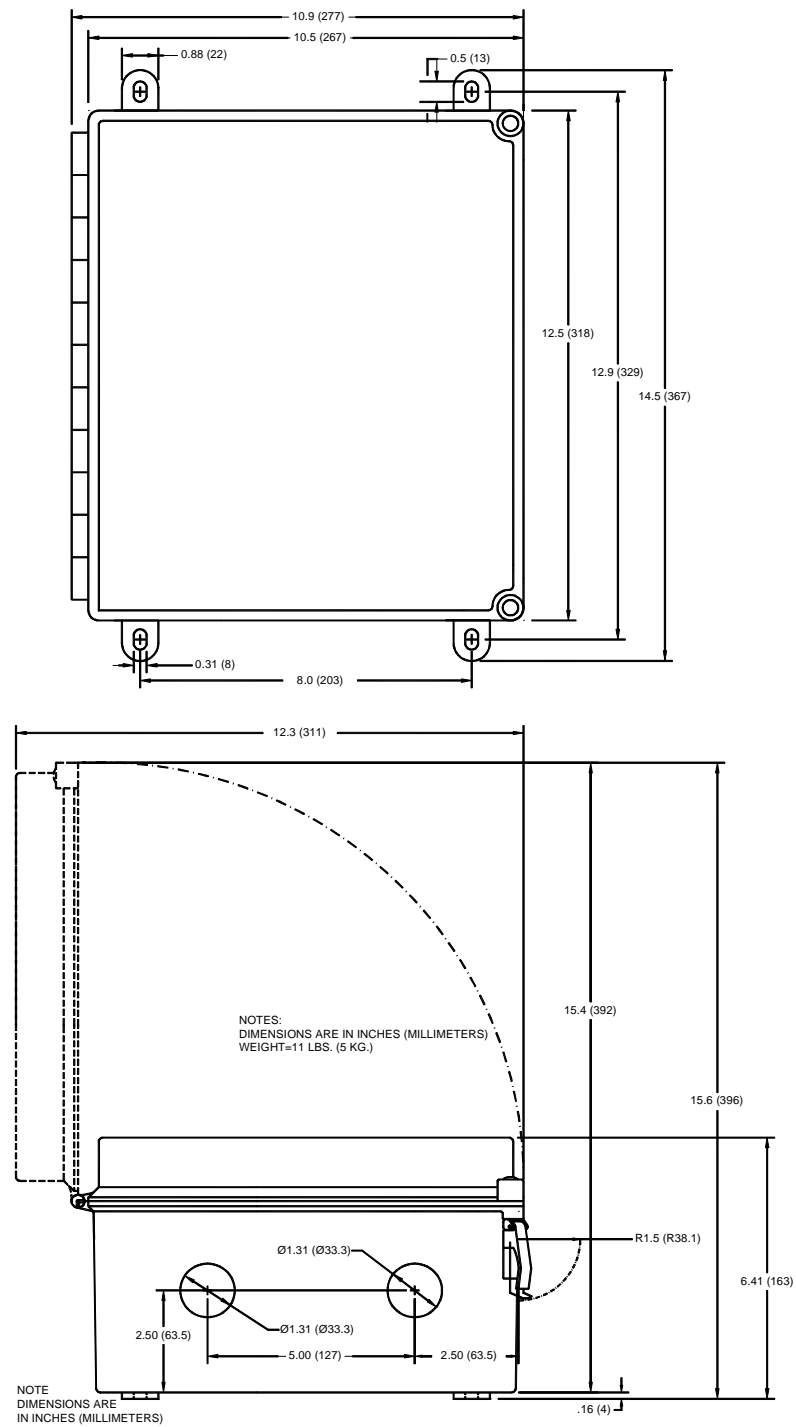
FTC 435 Series Controller Mounting and Outline
